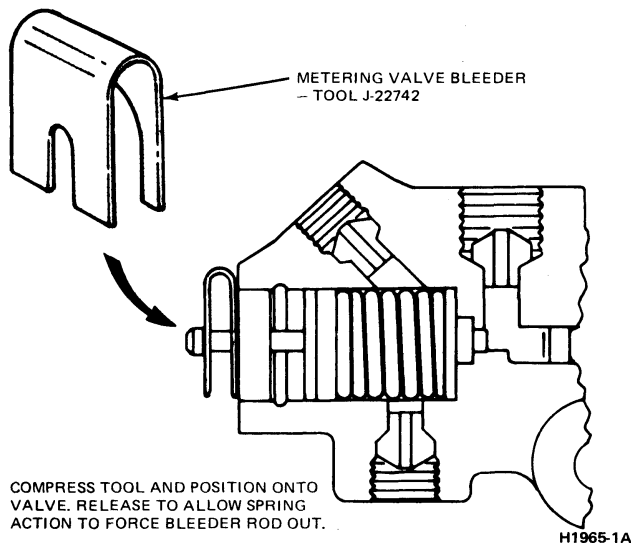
Pressure Bleeding Tool—Sliding Caliper Disc Brakes—F-100/F-250, (6200/6800 GVW), E-100—E-150, F-150-250-350, (4x4) and Bronco
